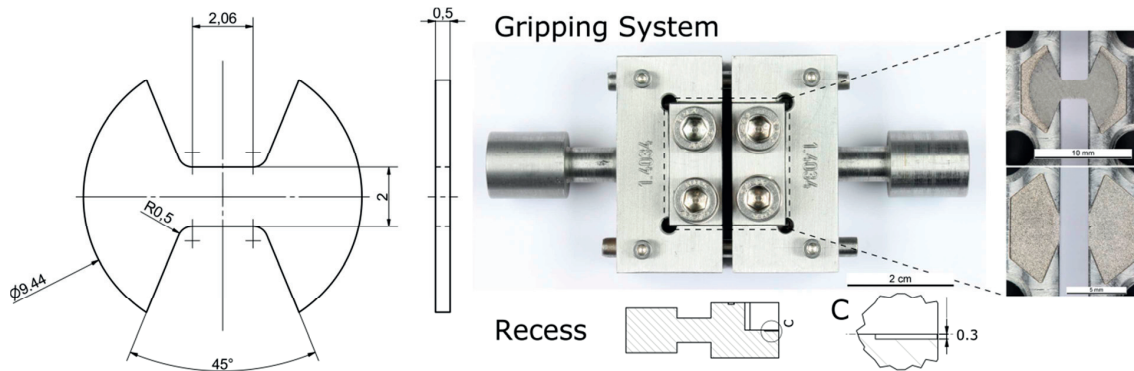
Non-standard disk tensile specimen geometry and dimensions as well as the designed DTS clamping system (dimensions in millimeters).
